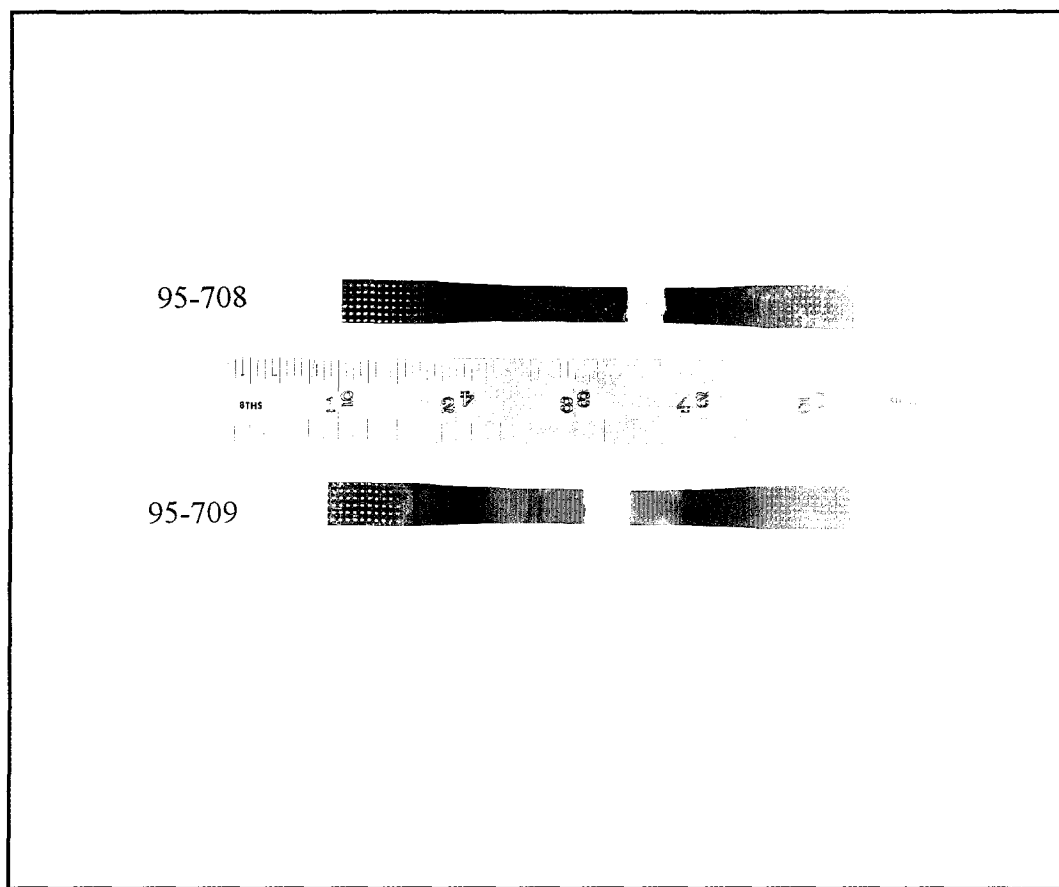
Fractured Specimens, Nos. 95-708 and 95-709
